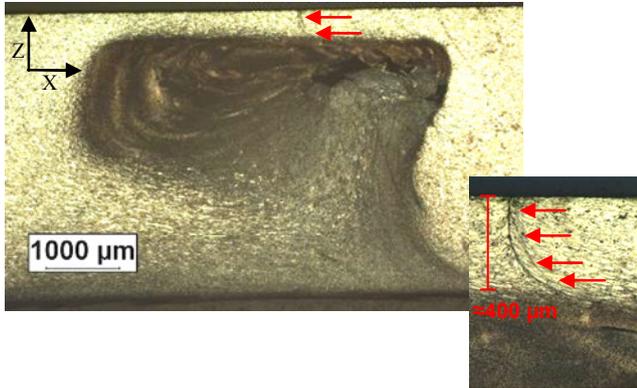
Transversal micrograph of the tested FSW joint. The defect is highlighted by the red arrows.
